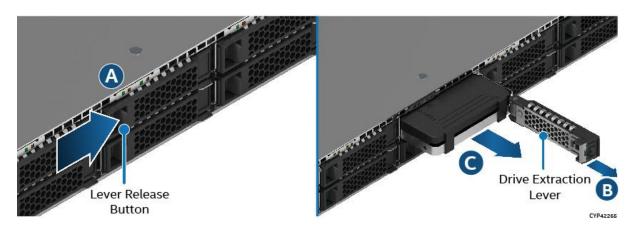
7 mm Drive Removal from 2.5" Drive Bay
